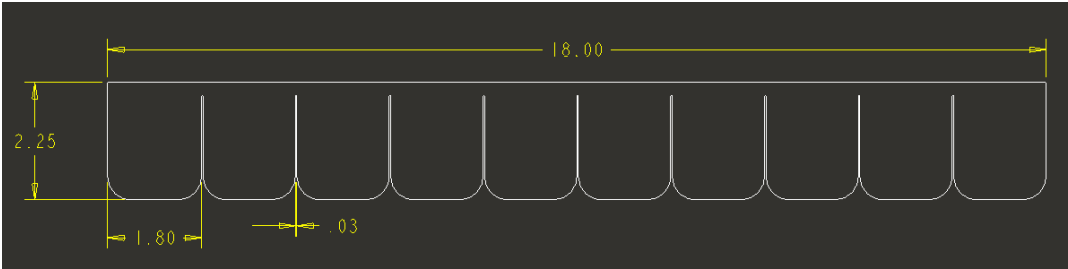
2D dimensioned drawing of horizontal aluminum strip
